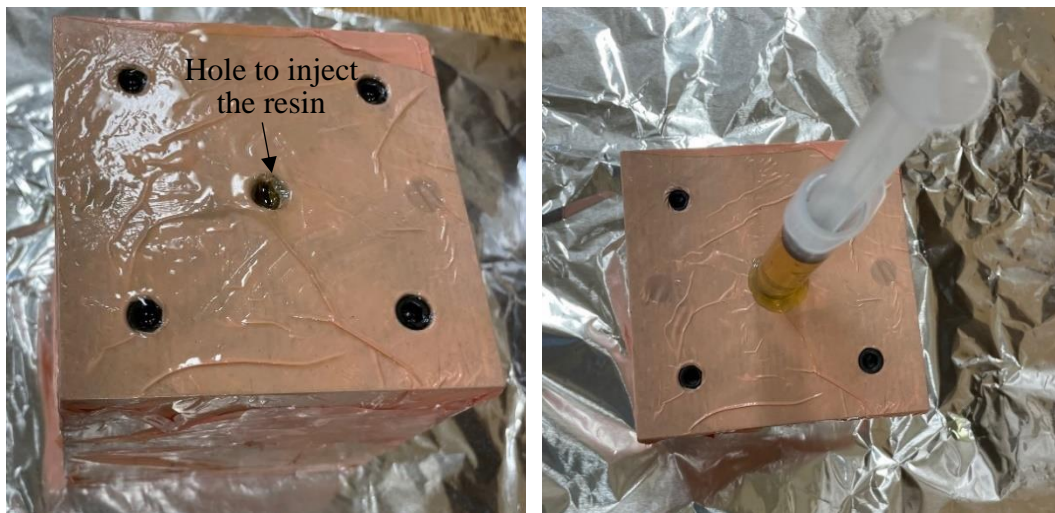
a) Two halves of the sphere mold closed and secured with Allen wrench for four screws; b) Second sample of cured steel sphere with carbon fiber strip and PF resin being injected into mold.
